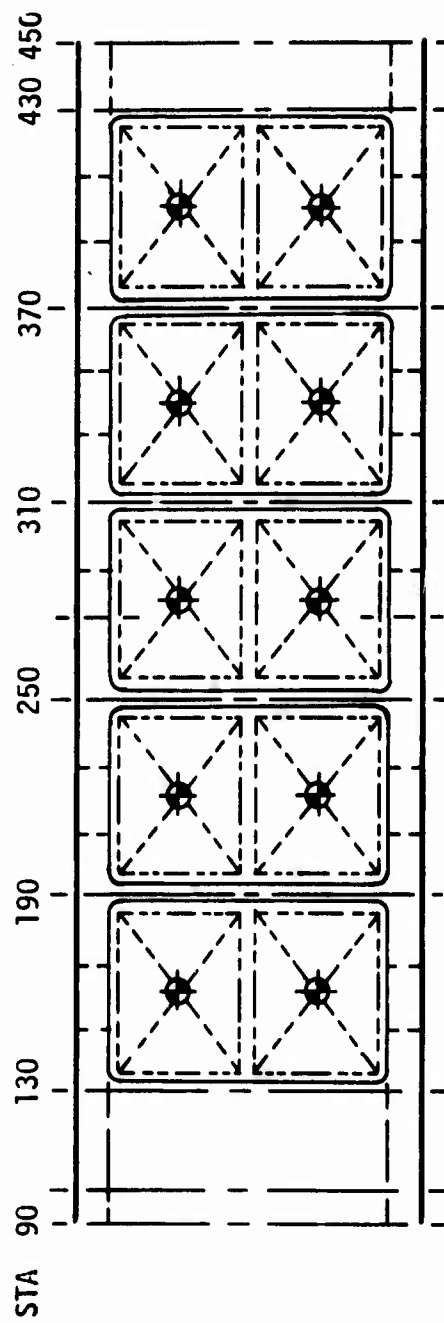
(U) Structural Arrangement for Double Row of Ten 40 x 48 Cargo Pallet Exits.
